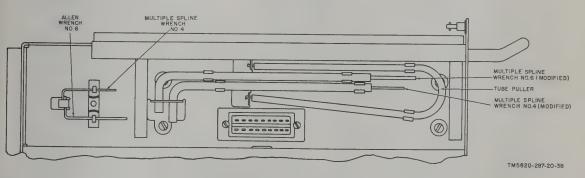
AM-2537/TRA-25, side view showing location of tools.
